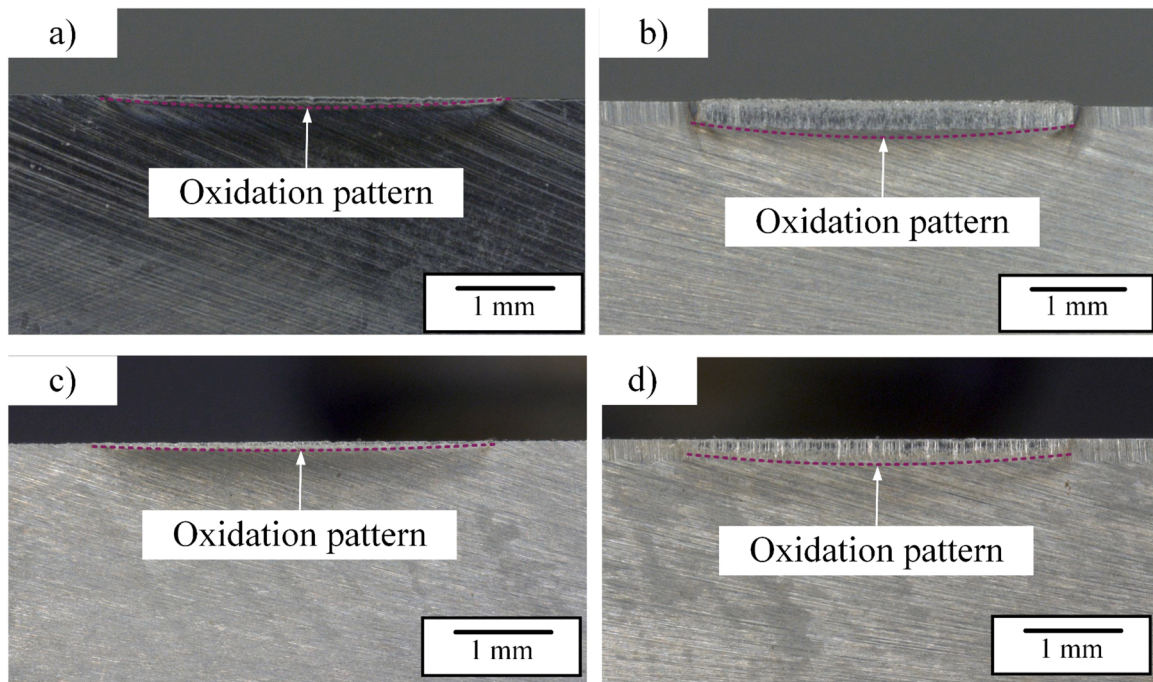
Optical microscopy of oxidation pattern on flank face with supply of coolants, a) AF0, b) AF2, c) AC0 and d) AC2.
